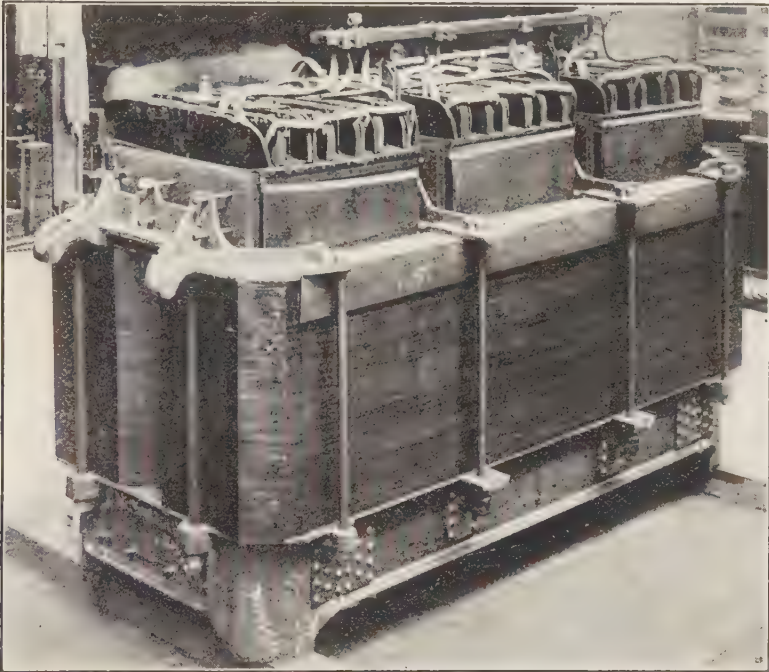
10,000-KVA, 60,000 TO 13,200-VOLT, THREE-PHASE TRANSFORMER, OUT OF TANK
